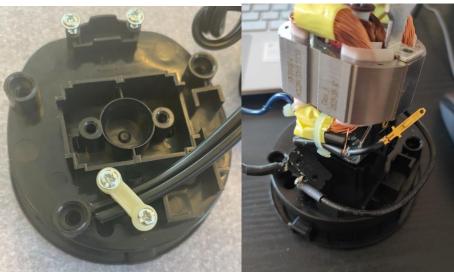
Cable Holder Disassembly Pictures, with holder (left), without (right)
